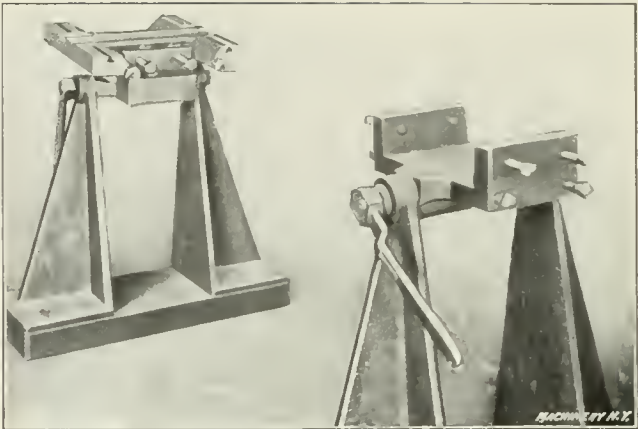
Scraping and Fitting Stands used to hold Work in Erecting Department
